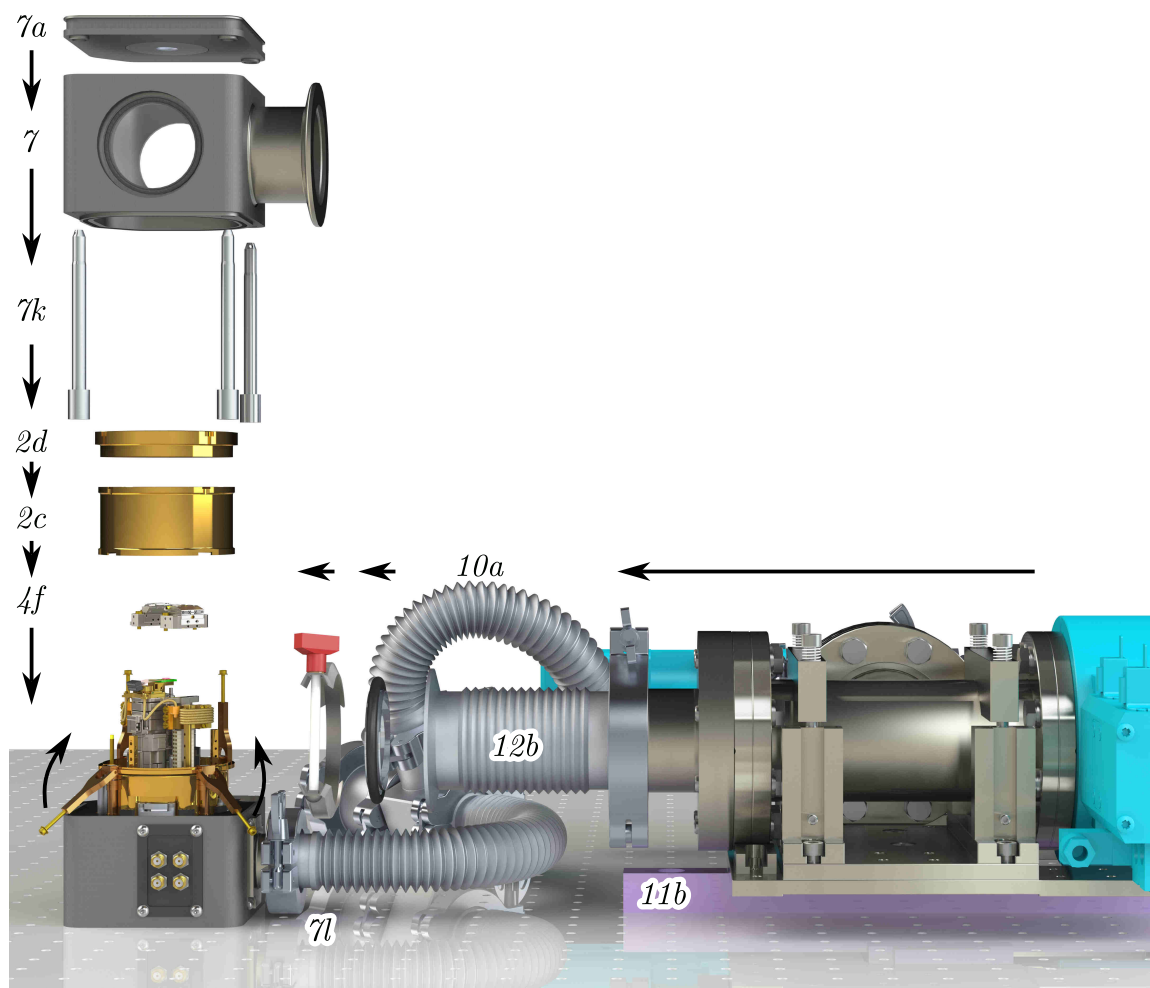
CAD models of the assembling procedure. Exploded view illustrating how the vacuum system is assembled after a sample or probe change. During pump-down, the 50-KF bellow (*12b*) compresses, and the entire vacuum system moves forward on the guiding rail (*11b*). Component labels are defined in Tab. 3.1. Several CAD files are property of Montana Instruments[®], Pfeiffer Vacuum AG, and VAT Group AG.
